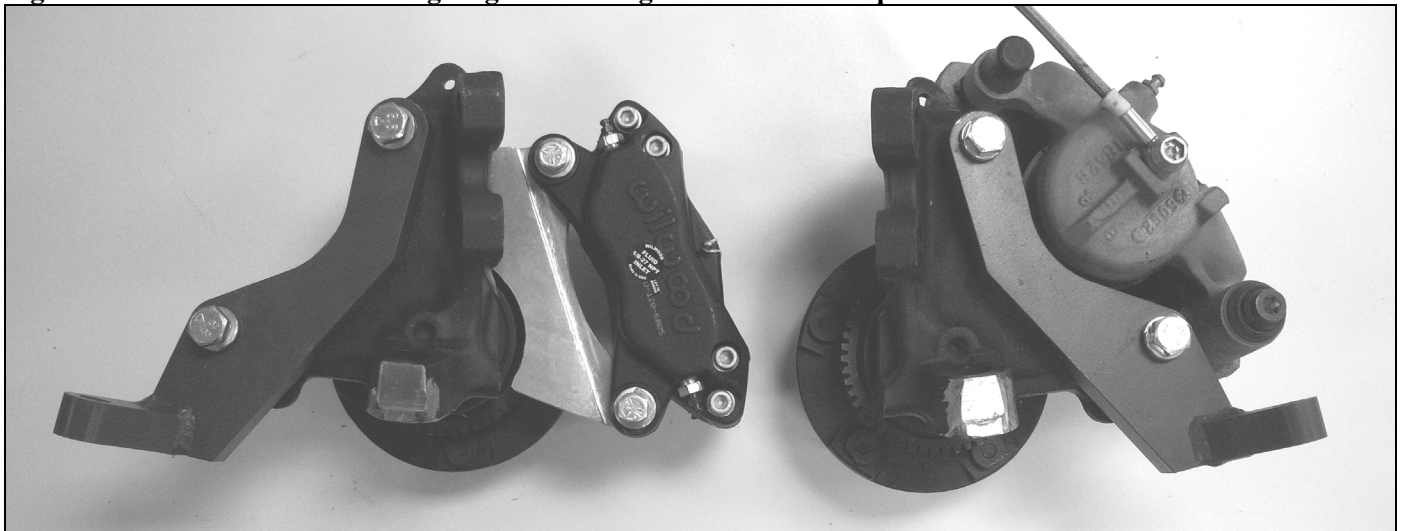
LH spindle and steering with Wildwood brakes RH shown with stock caliper and bracket
